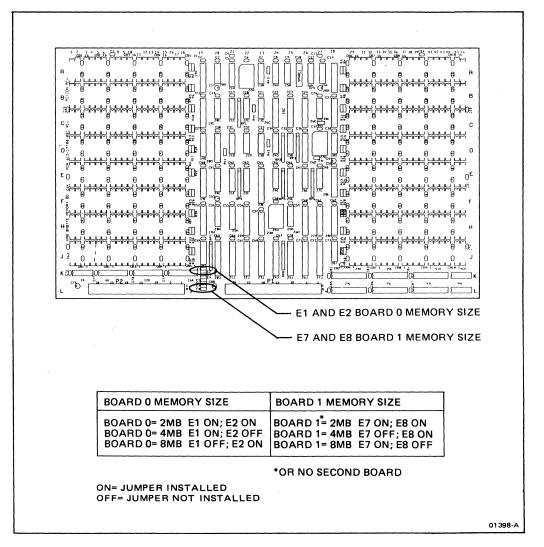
Memory Configuration Jumpers on Board 0, Board 1, And Board 2
